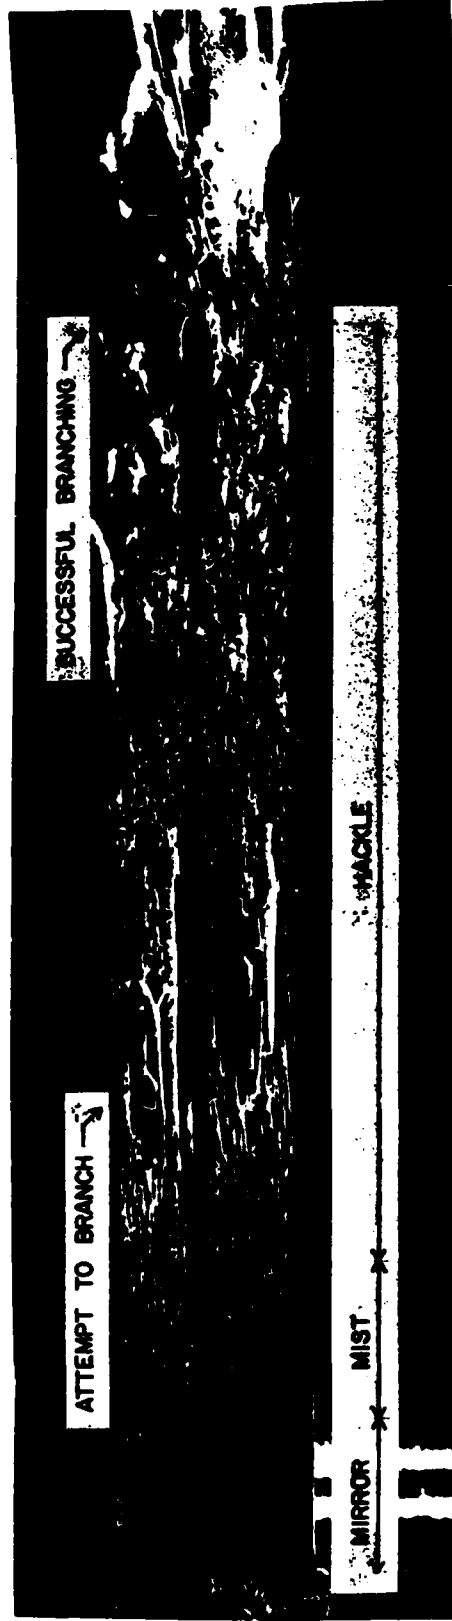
FIGURE II. FRACTURE SURFACE SHOWING CONTINUOUS CHANGE IN ROUGHNESS PRIOR TO BRANCHING.
